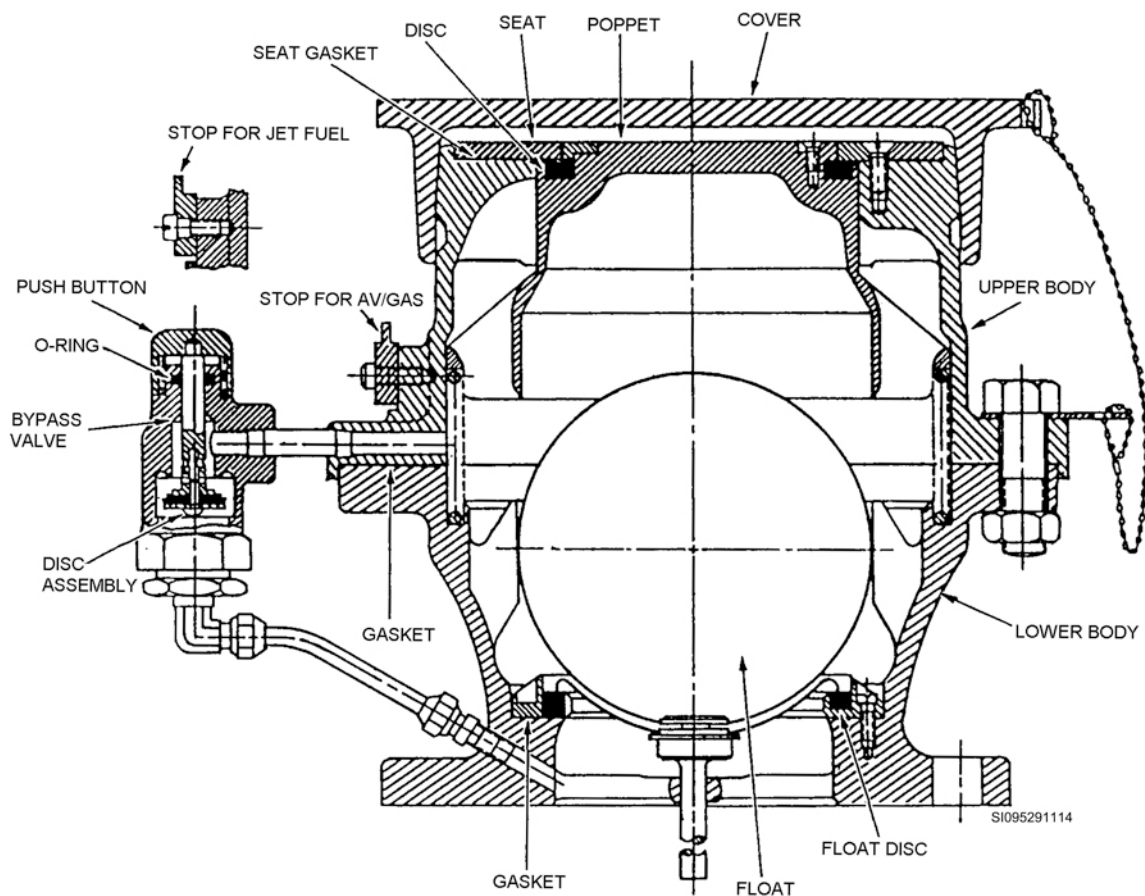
Hydrant adapter and level control valve, 352AF. (By courtesy of Cla-Val Co.)
